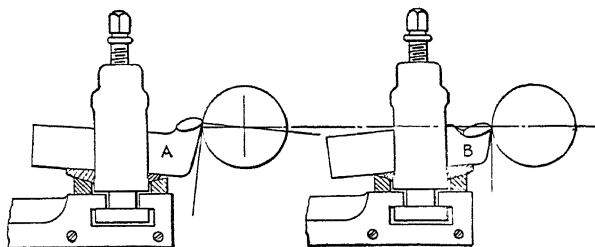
Setting a lathe tool to get the proper clearance angle. A front clearance of 10° or 12° is usually ground on a forged tool. Note the position above the center of the new tool A so as not to give excessive front clearance. Note B, which represents the position of the same tool after being sharpened several times, set on center to give correct clearance.
